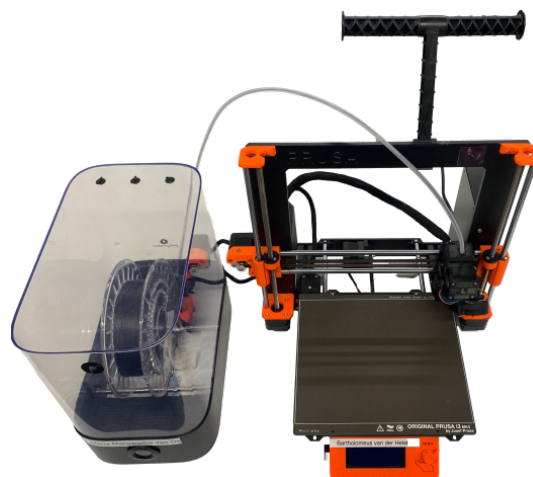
Printing setup: the Prusa MK3S+ printer was used to print the TPU CF material, which was stored in an airtight box with silica gel. The printer was equipped with a hardened steel nozzle and a textured build plate.
